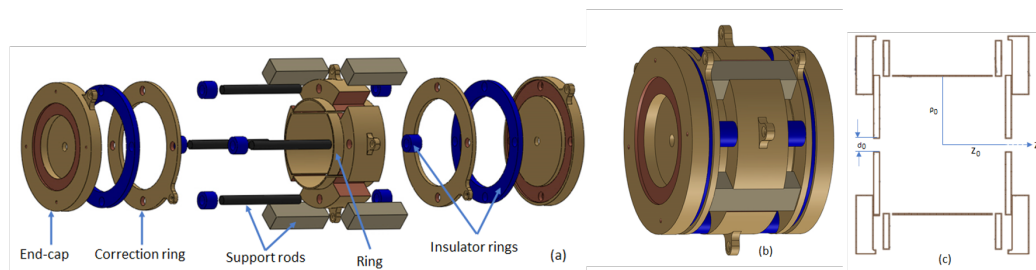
Schematic drawing of the capture trap: (a) exploded view—copper-colored components are the electrodes, blue components are insulators, and brown components are insulated support rods; (b) assembled view; (c) cross-sectional outline with labeled dimensions.
